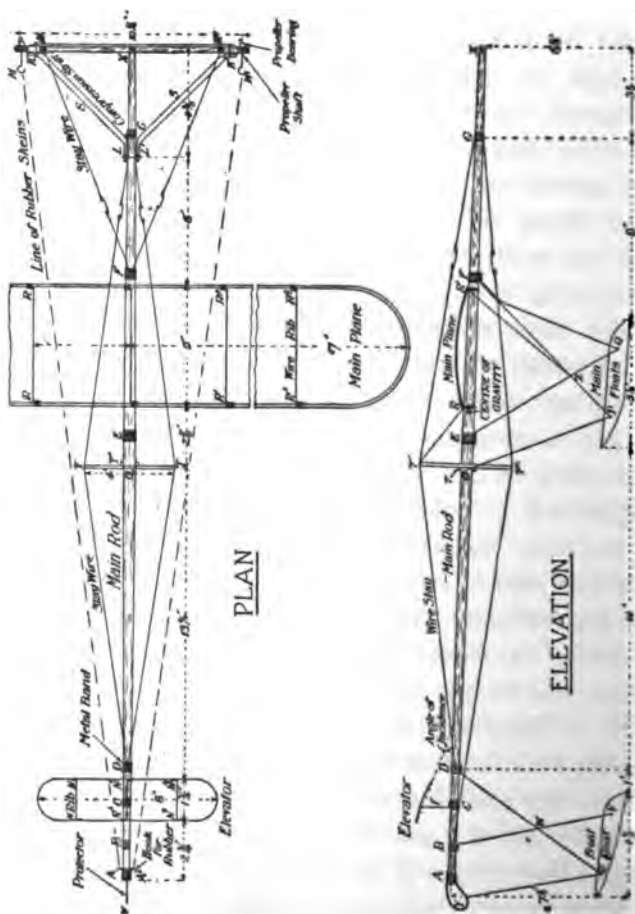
Plan and side elevation of hydro-aeroplane (one-eighth full size).
